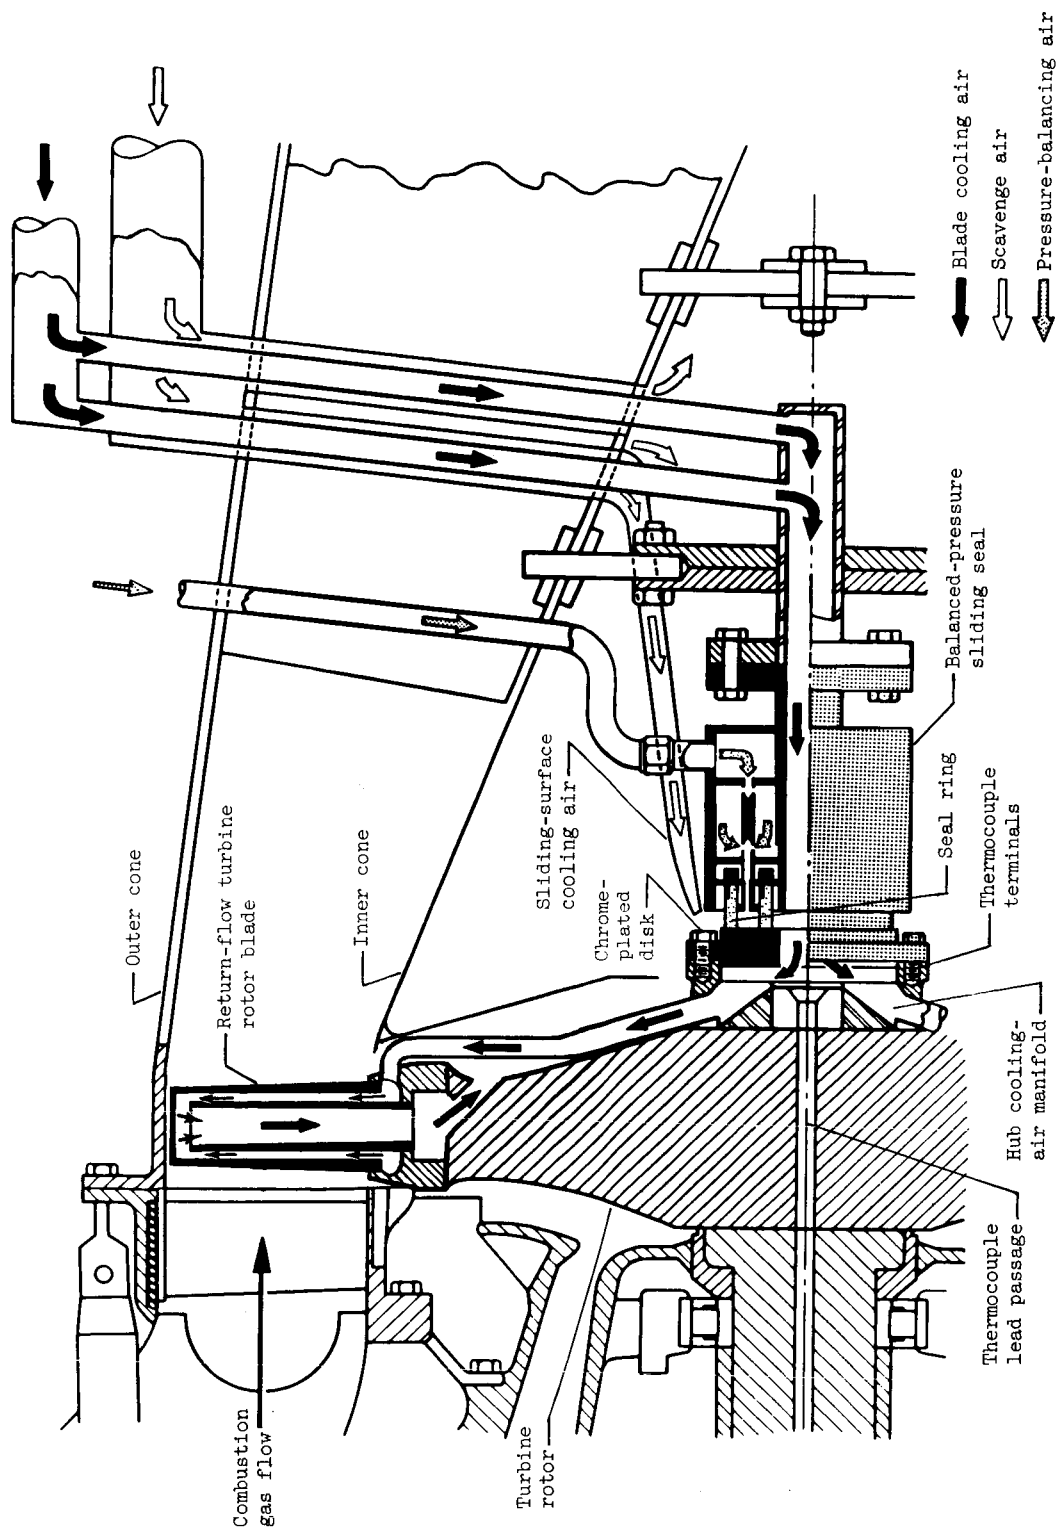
Schematic drawing of return-flow blade installed in turbine rotor of turbojet engine modified for turbine-cooling research.
